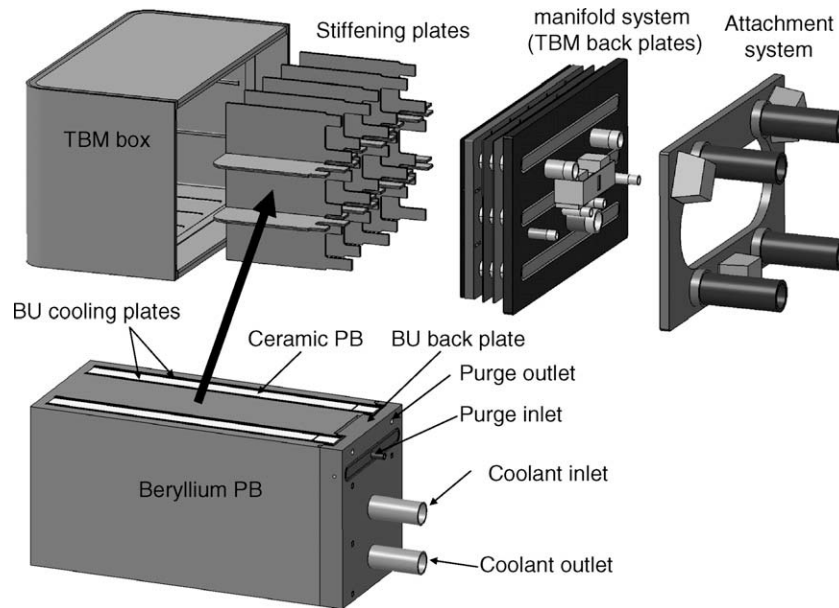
Exploded view of the HCPB TBM in its horizontal arrangement.
